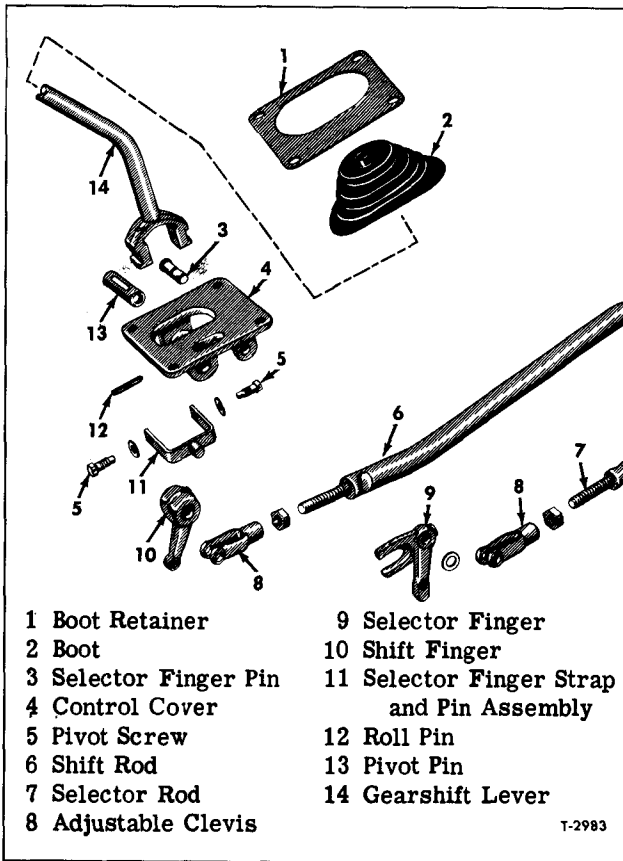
Typical Control Island Shift Mechanism (70-80 Series)
